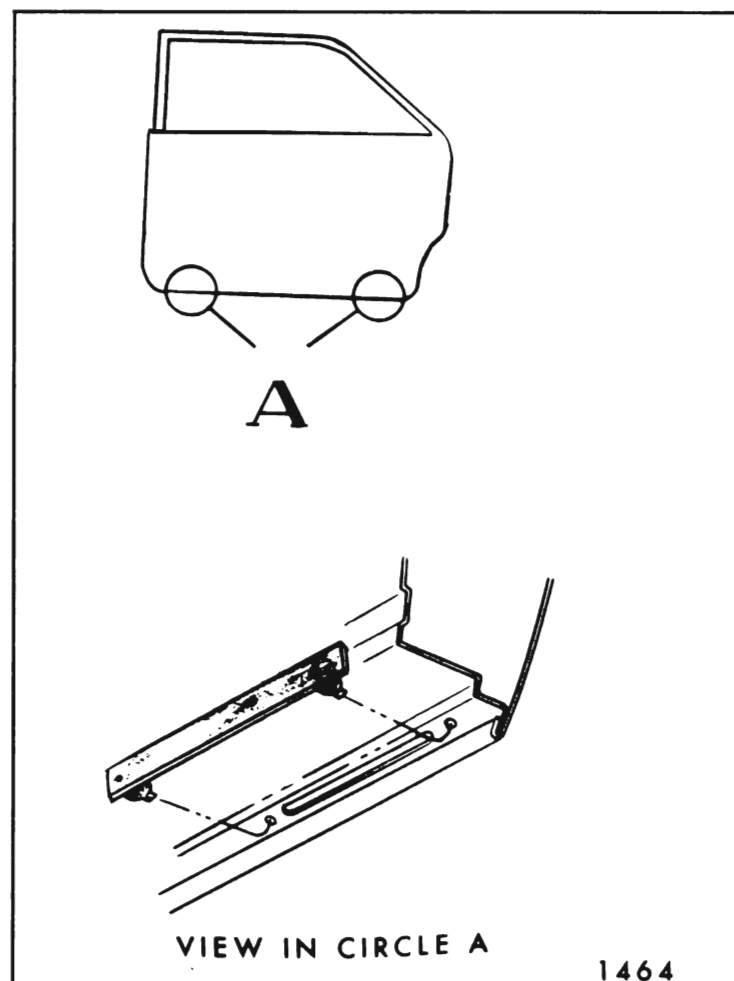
Door Bottom Drain Hole Sealing Strips
